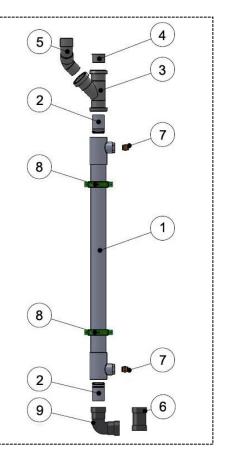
Component arrangement. *All waste pipe fittings are push-fit (50mm O/D). Part No. 10 is supplied to convert these to a UK 40mm push fit or solvent weld waste system (O/D 43 mm)
